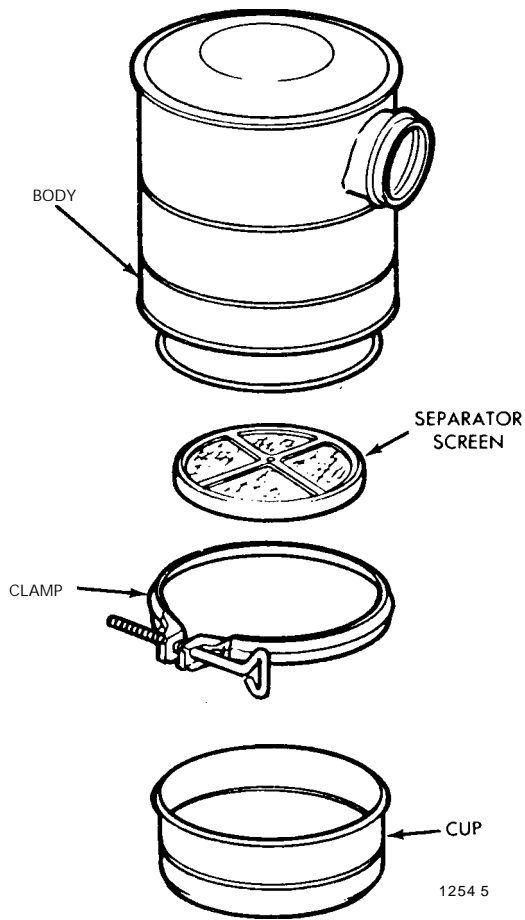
Light-Duty Air Cleaner Details and Relative Location of Parts
